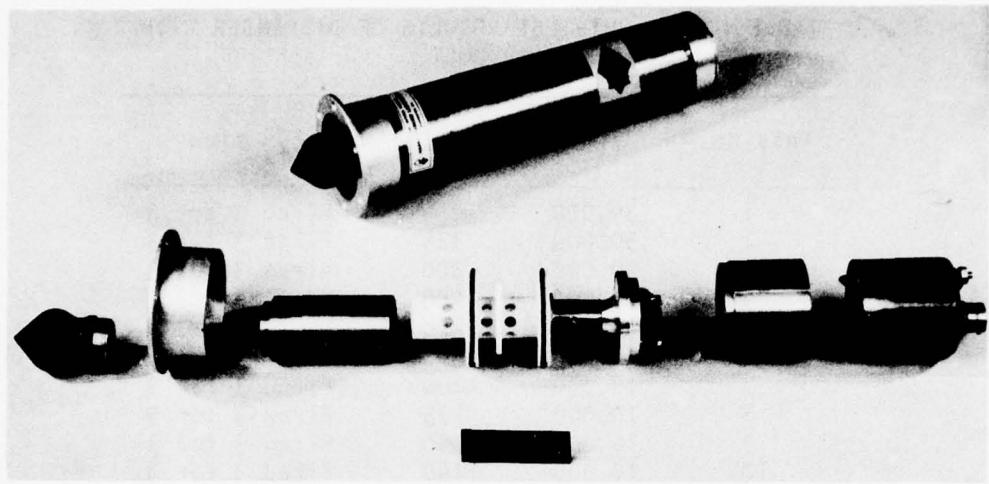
Components and assembled view of airspeed actuated safety and arming device.
